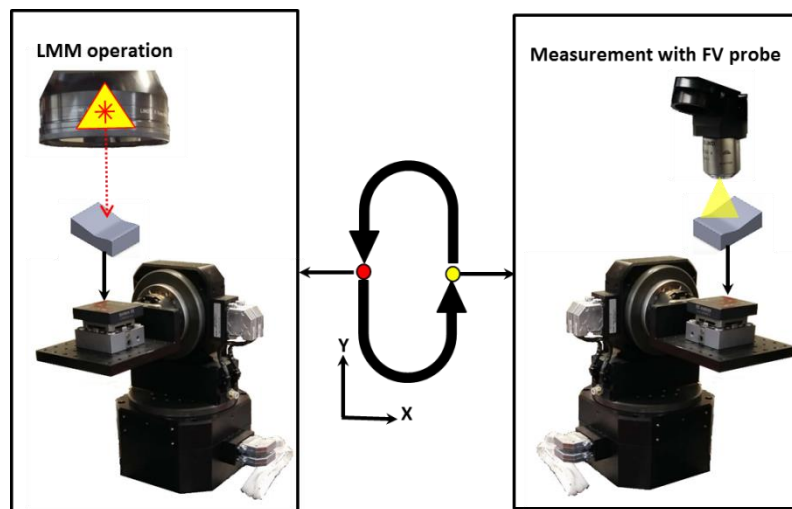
Workpiece’s setting up routine with a FV probe integrated into a LMM platform with C rotary stage to swivel between machining and inspection positions
